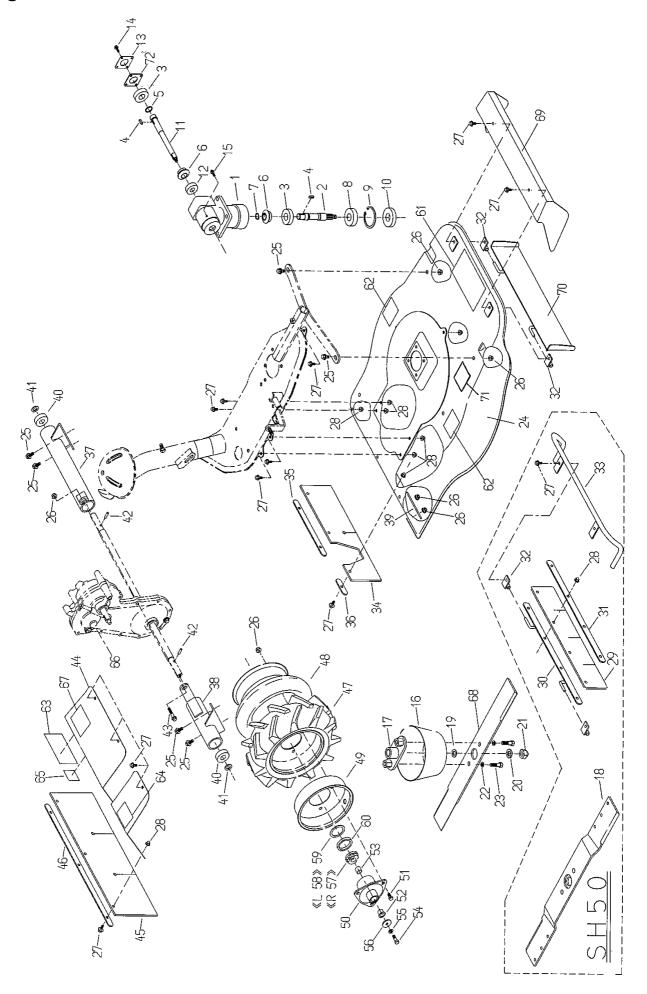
GEAR BOX, ROTARY COVER & TIRE
